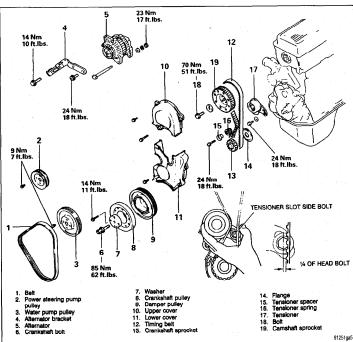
Exploded view of the timing belt covers, timing belt and related parts—1990–94 1.5L engine
